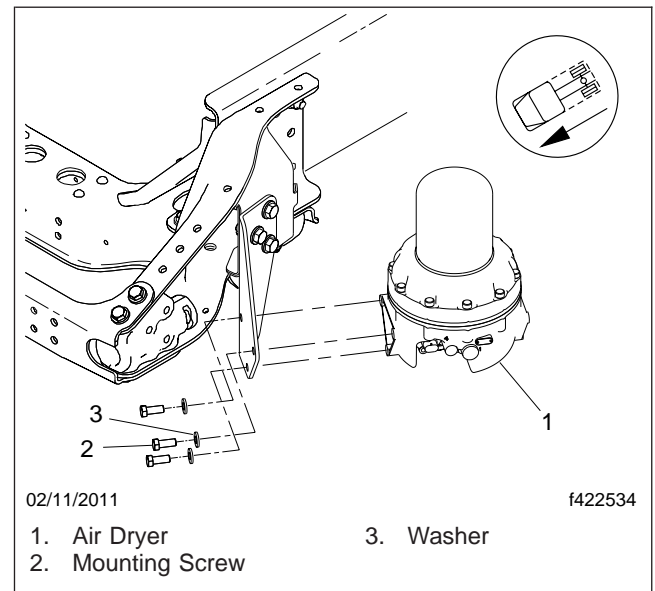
, Air Dryer Installation (left-hand forward frame mounting shown)
